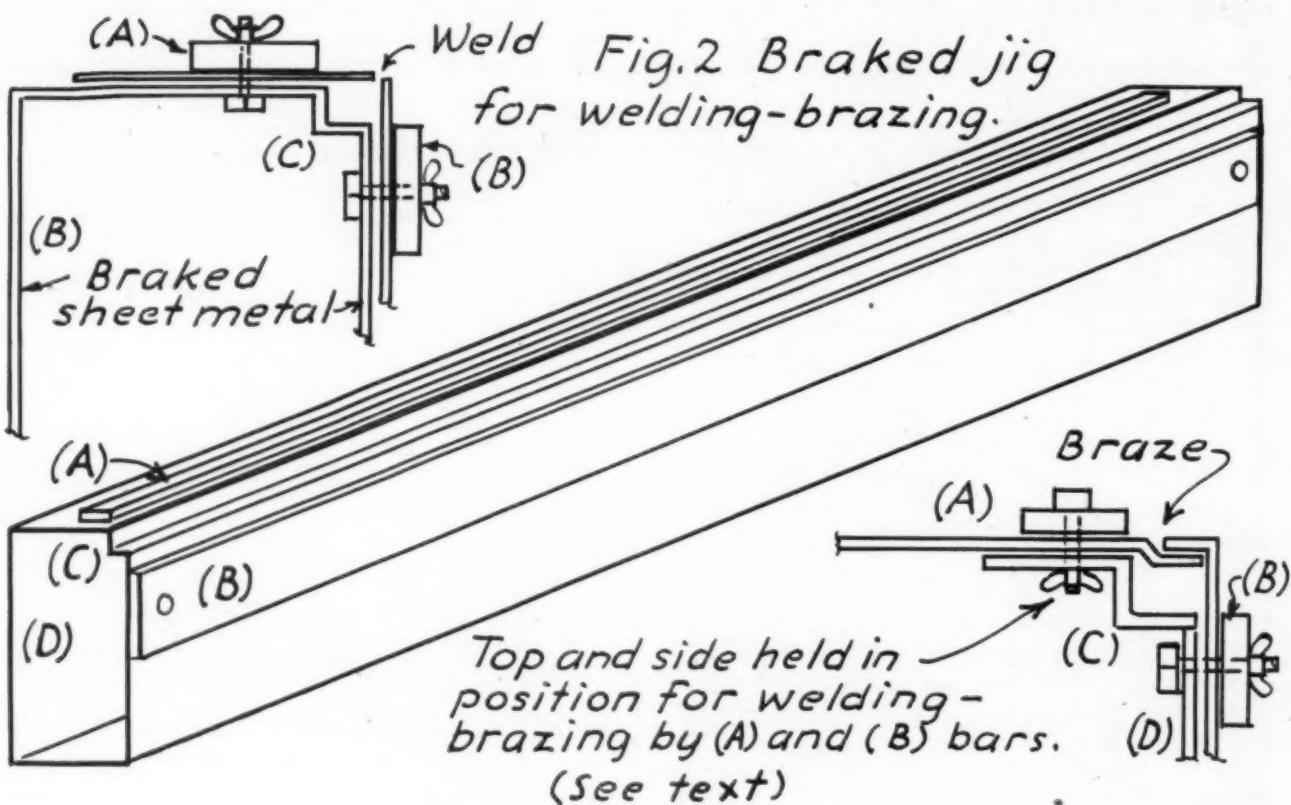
, of the drawings shows a braked construction of the jig, the metal used for it being 18 or 16 gauge, joined by tack-welds in the inverted corner (C). This jig is about six inches longer than the section of duct; and in the three inch margin on each end are holes for bolts, (fastened by wingnuts) which tighten bars (A) and (B) against the metal of the jig thus clamping the metal of the duct to be brazed as shown in the lower right hand corner of the drawings in Fig. 2. The duct to be welded is similarly clamped for work as shown in the upper left hand corner of Fig. 2. The inverted angle (C) shown in both applications, is only about one inch deep and one inch wide, just enough to provide an open space under the lap to be brazed, or the duct edges to be welded. This space is a necessary condition in both cases in order to keep the heat applied from being quickly lost. With the open space (C)
